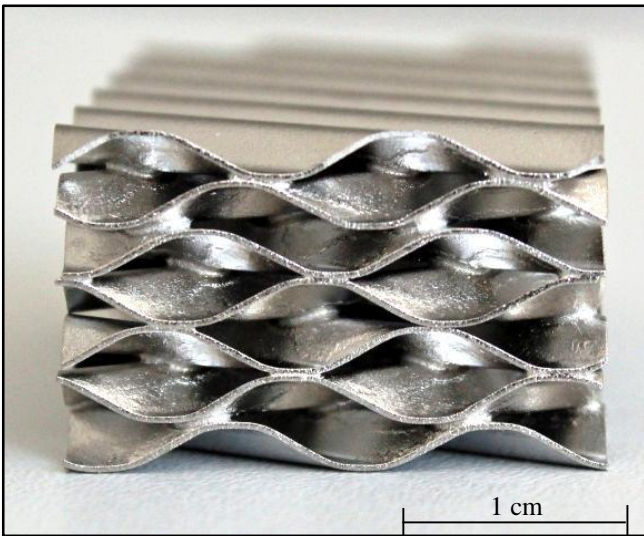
Vacuum brazed specimen using VZ2150 brazing foil as filler material.
